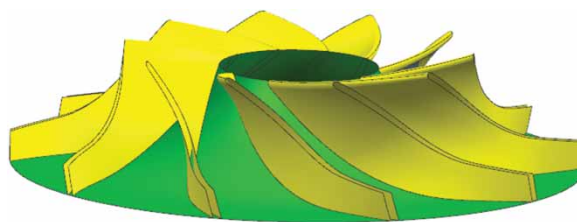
Blade surface of impeller to be machined with barrel cutter.
